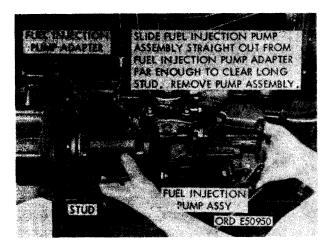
REMOVING OR INSTALLING FUEL INJECTION PUMP ASSEMBLY.
